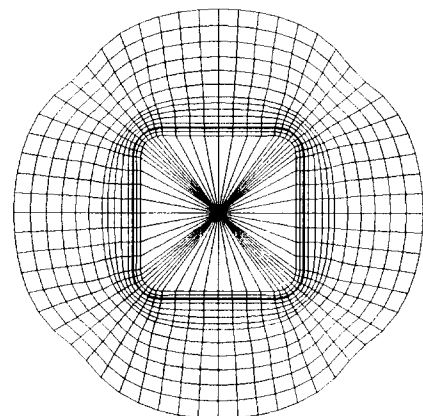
Calculated blank for multi-stage deep drawing (H1=15 mm, H2=30 mm)
